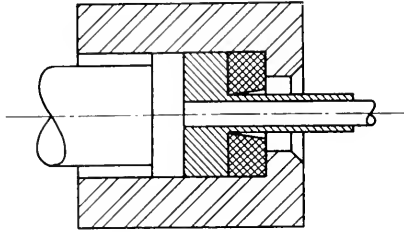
illustrates the technique used for producing hollow sections and tubes. As can be seen, a mandrel or a needle passes freely through a hole in the blank and the die opening. If the die opening is circular, an annular clearance between the die opening and the mandrel results. When the metal is extruded through the annular clearance, it forms a tube. A hole has to be pierced or drilled into the original blank before it is extruded.
